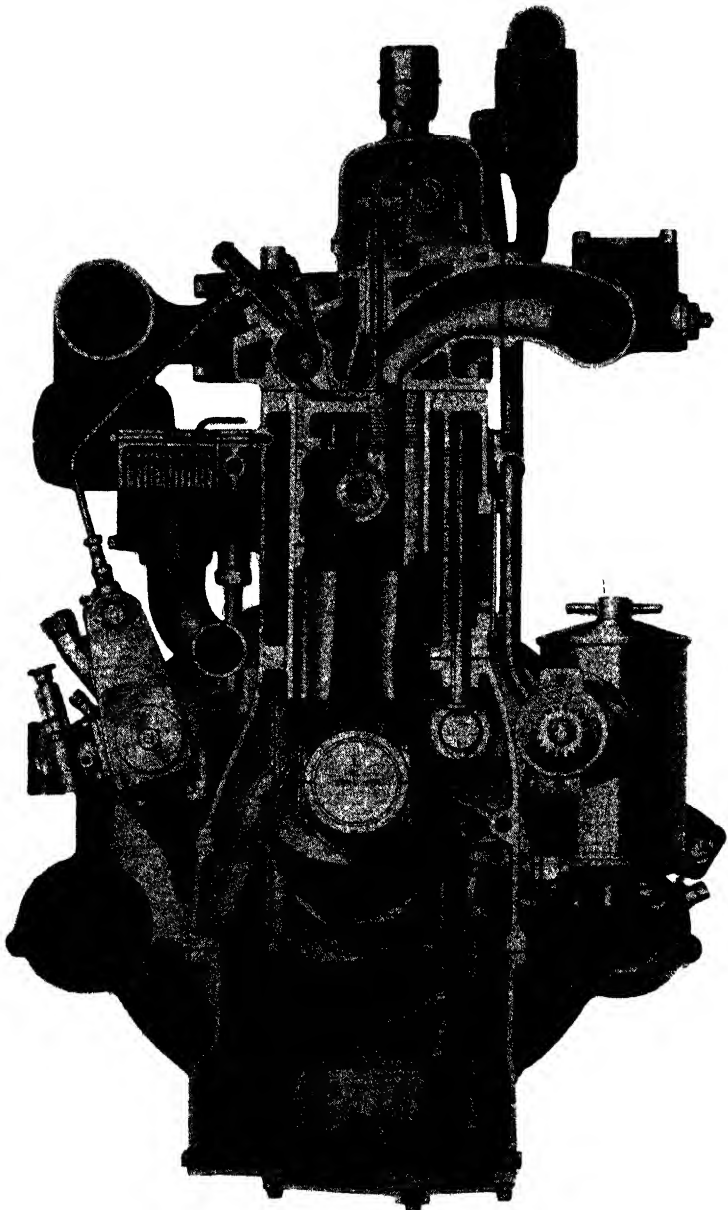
CROSS SECTION OF WAUKESHA ENGINE.
